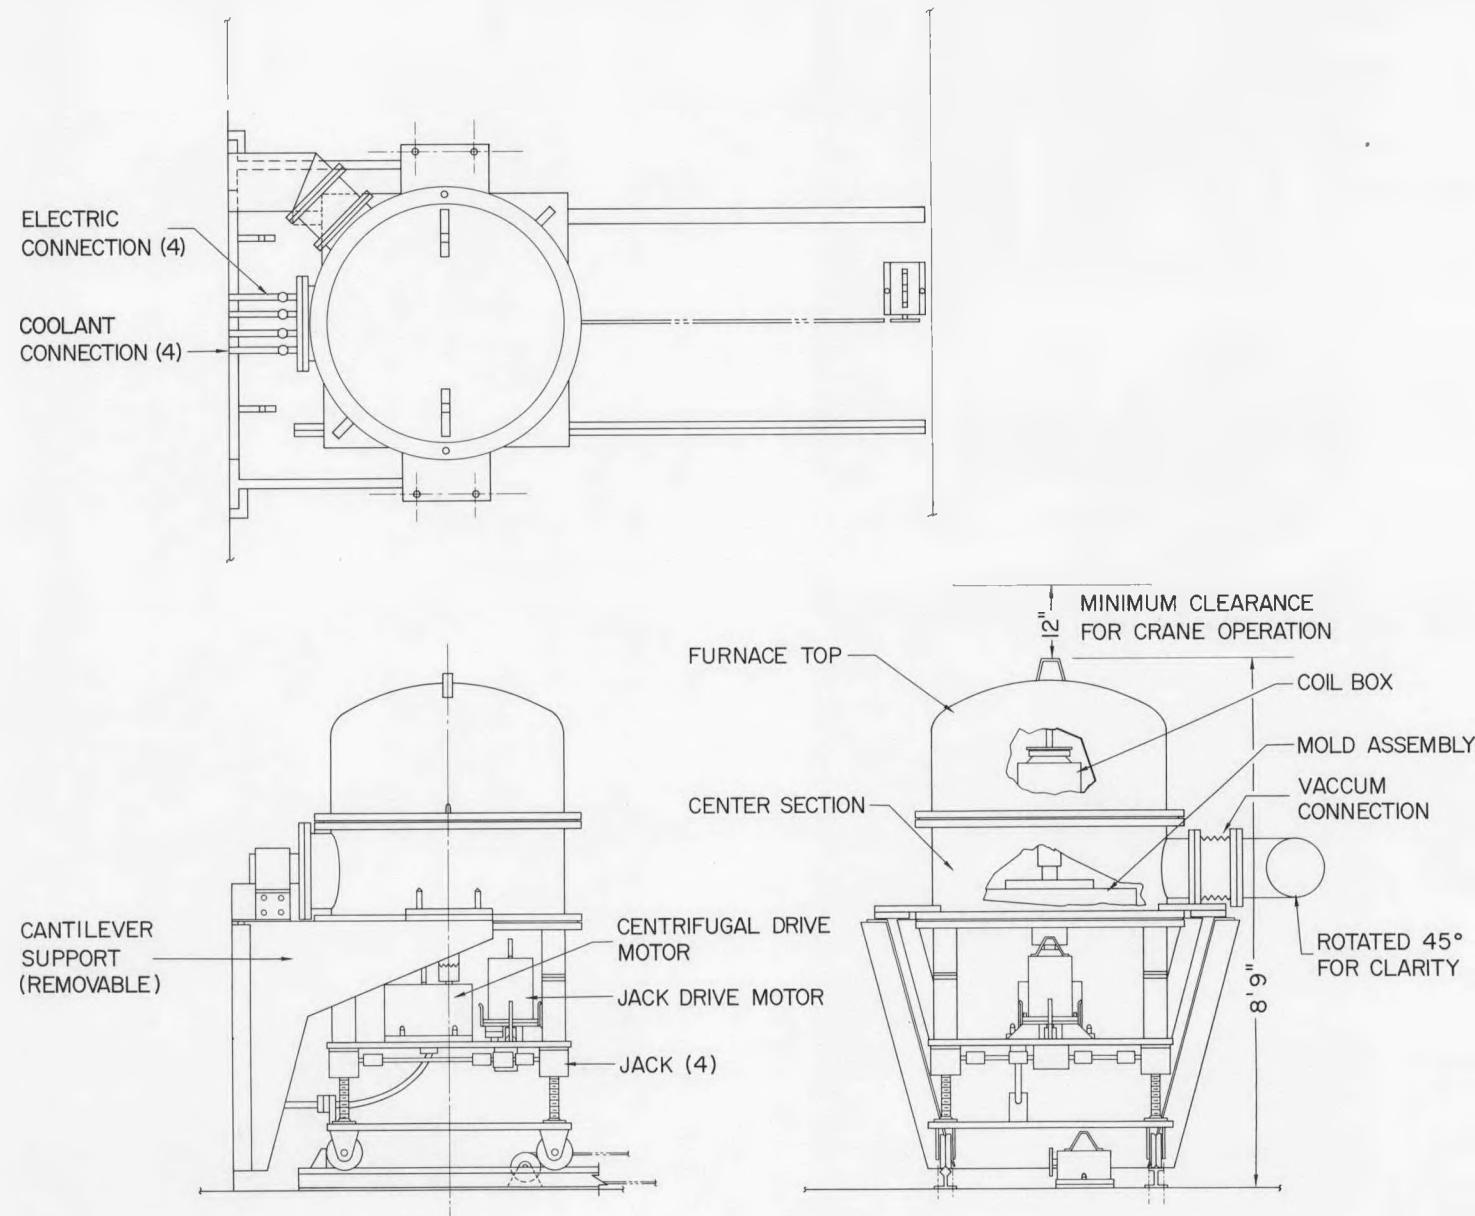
Conceptual Design of PRE In-Cell Vacuum Casting Furnace - Assembly
